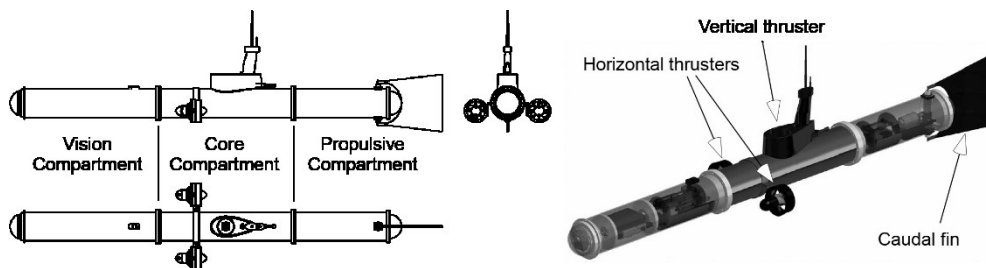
BRAVe blueprints and compartments assembly (left), thruster configuration (right) [68].
